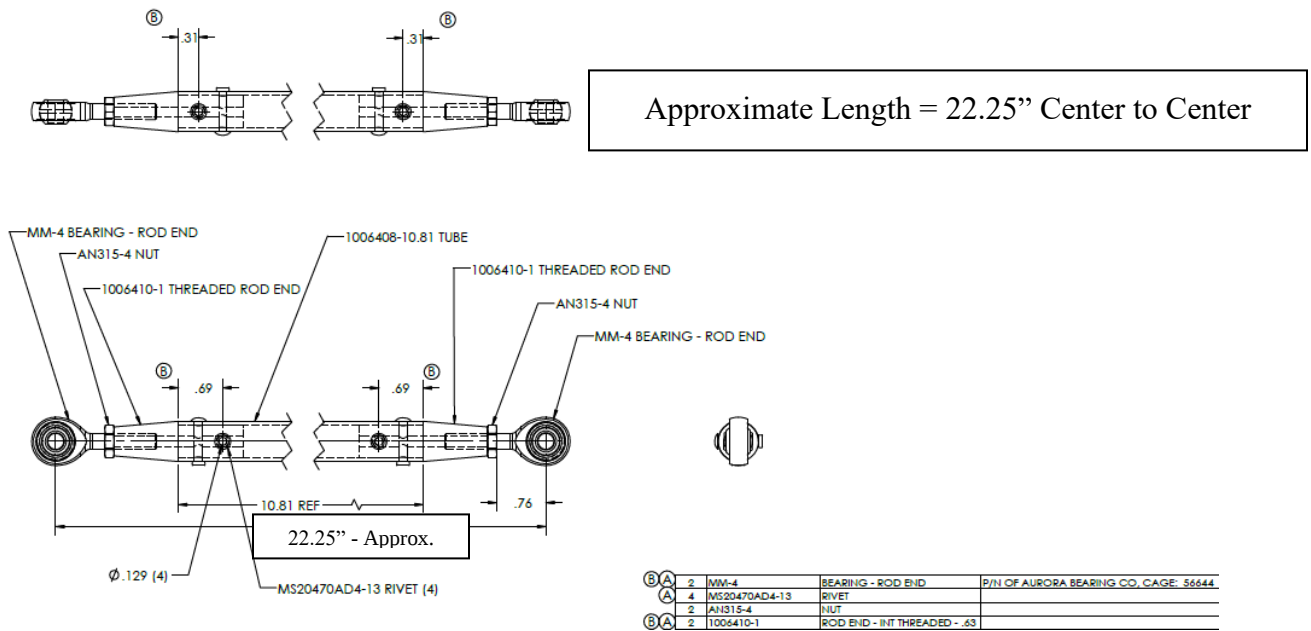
PITCH PUSH PULL TUBE RIVET PLACEMENT DIAGRAM
